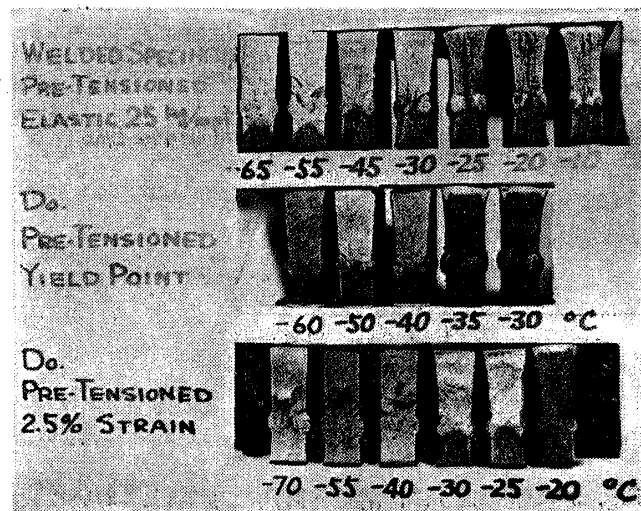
Fracture appearance of specimens tested (7)~(9)
